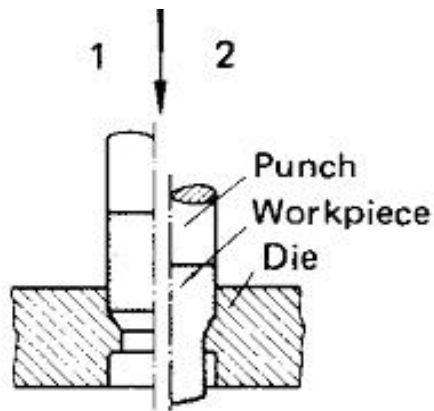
schematic representation free extrusion process. 1. Initial shape of the workpiece, 2. Final shape of workpiece (*Lunge, Handbook of Metal Forming*)
